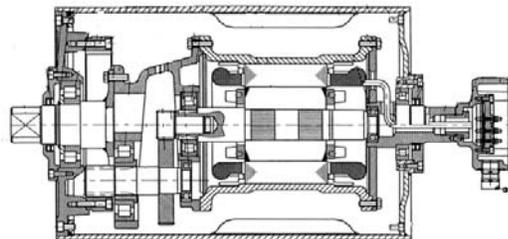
Cross sectional diagram of motorized pulley. AC squirrel cage induction motor and helical/spur gearbox are shown. Note that pulley shaft is "dead" (non-rotating) and all electrical terminations are made at the shaft-mounted junction box. "Drip lips" are welded to the pulley shell inner surface to circulate oil for motor cooling and mechanical lubrication.
